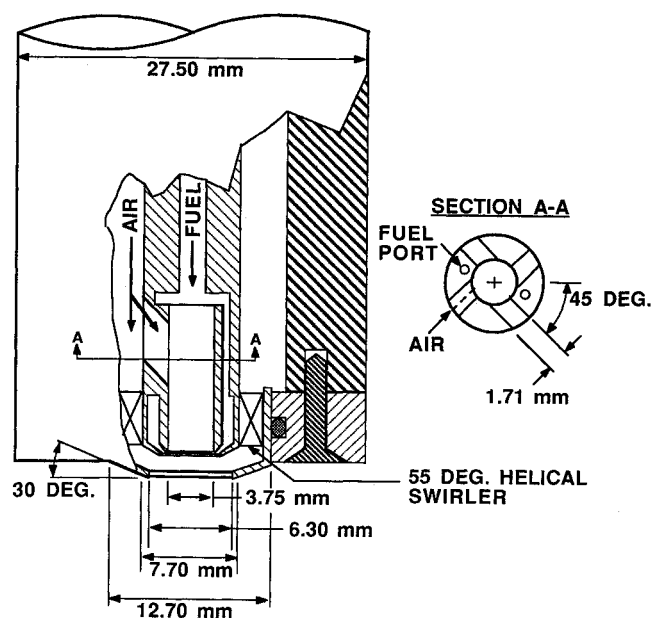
Air-blast atomizer and fixture used to supply air and fuel.
